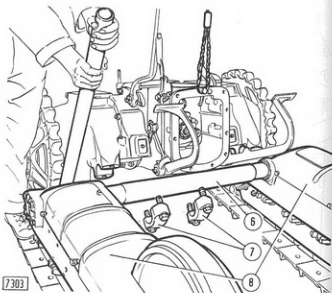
Removing the Track Carriages from Bevel Drive/Hub Reduction Case
